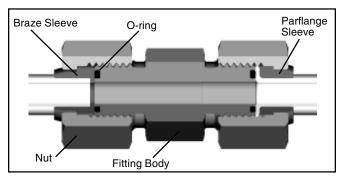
Seal-Lok Union cutaway with flanged and brazed assemblies
